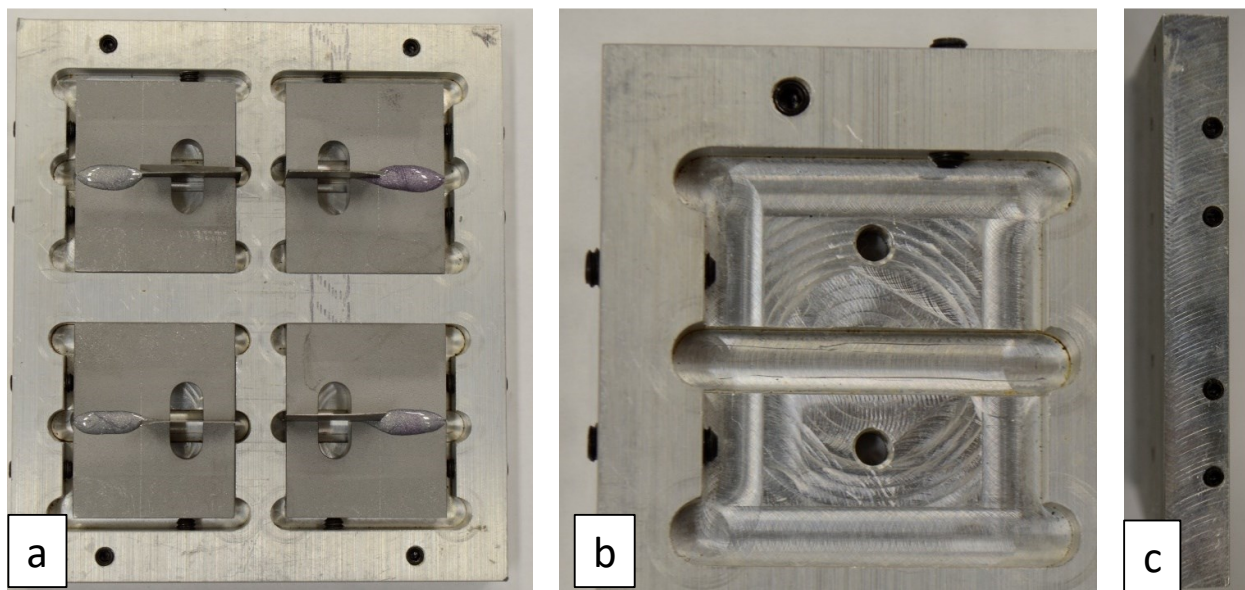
RDCB fixture (a), with excess adhesive channels (b), and set screws for specimen fixation during curing (c)
